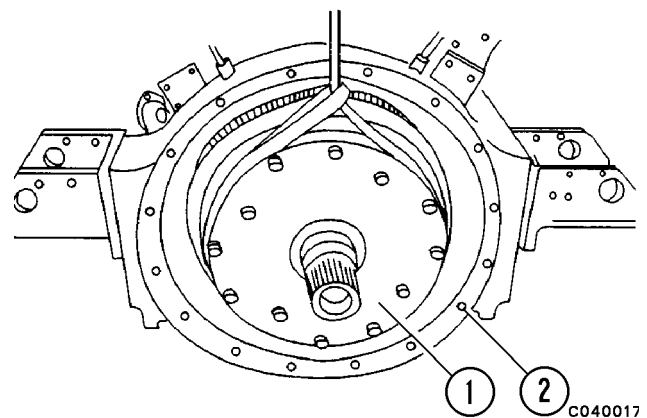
OUTPUT SHAFT DAMPER ASSEMBLY
